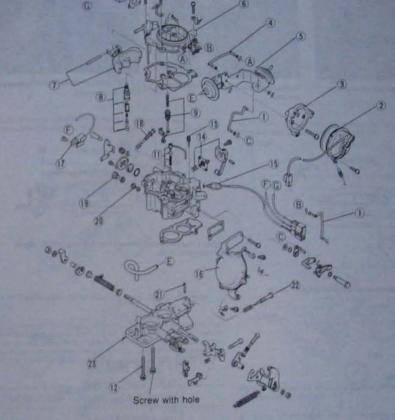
Exploded view of the Aisan carburettor (Sec 12)
